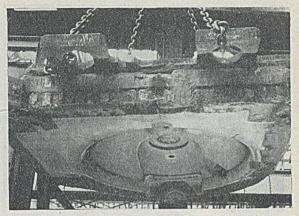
Top Plate with the Top Part of the Mould attached ready for Trying on.
